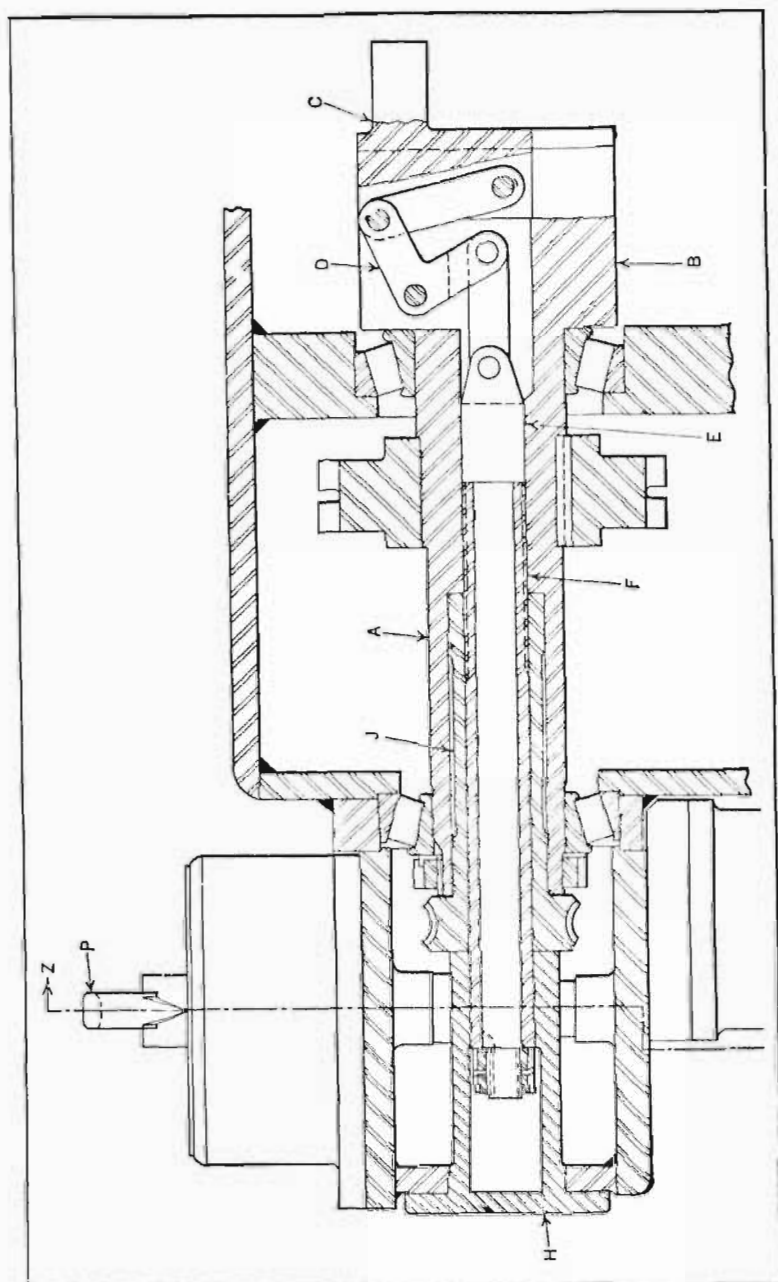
Motor-driven Mechanism Combined with an Electric Switch for Changing the Radial Position of a Crankpin to Vary the Crank Throw
